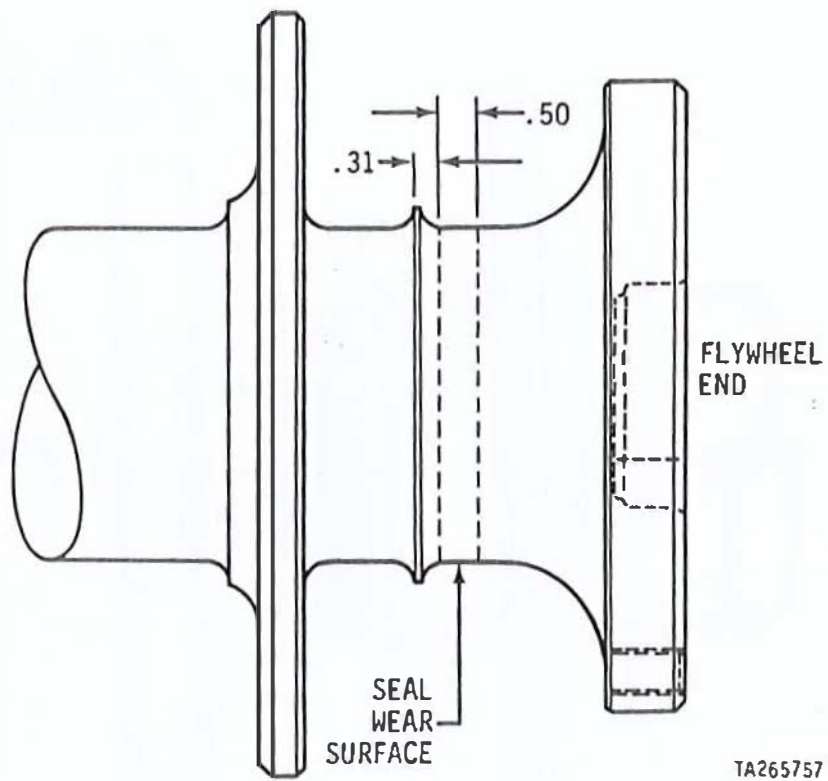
Rear oil seal wear surface on flywheel end of crankshaft.
